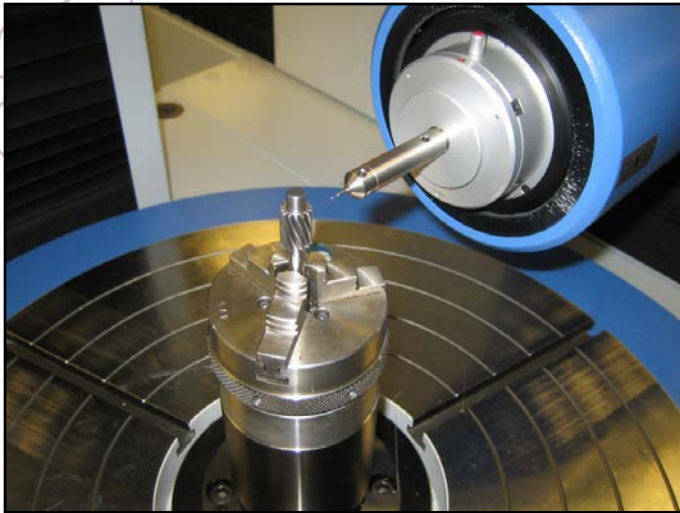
Klingenberg P65 with a 0.5 mm diameter probe inspecting a 0.7 mm module gear in accordance with ISO1328-1 (the minimum standard probe is 0.3 mm diameter).
